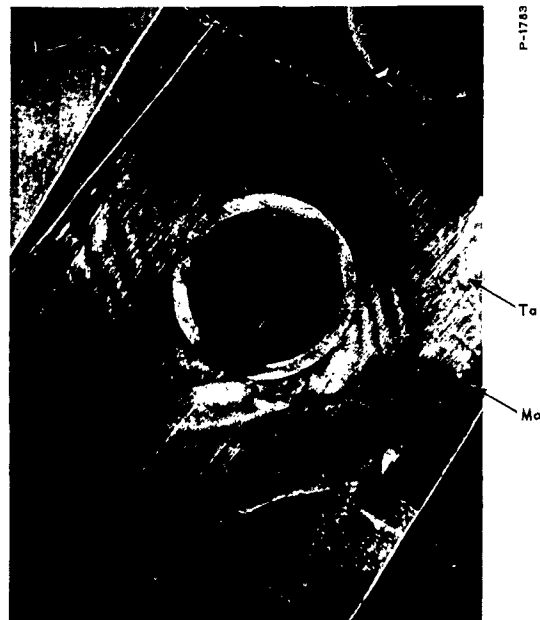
Tantalum Interleaf Used in Ring Welding Trials
